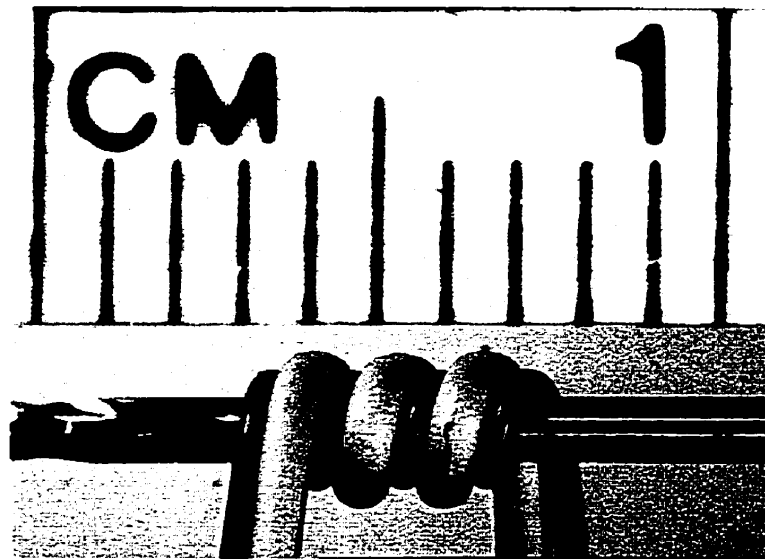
Photograph of the bending involved in the test of ductility for finished plated wires. The test involved wrapping the wire around a 1mm steel twist drill and then inspecting the wire for any breaking or cracking. In practice a wire for a solenoid winding would never suffer this extreme bend radius, but the test was necessary to optimize the overall plating process on aluminium. A dummy wire is sometimes used to obtain a well-defined space between windings. (Note: The mark on the right winding is a scratch caused by the tools used in the winding process.)
